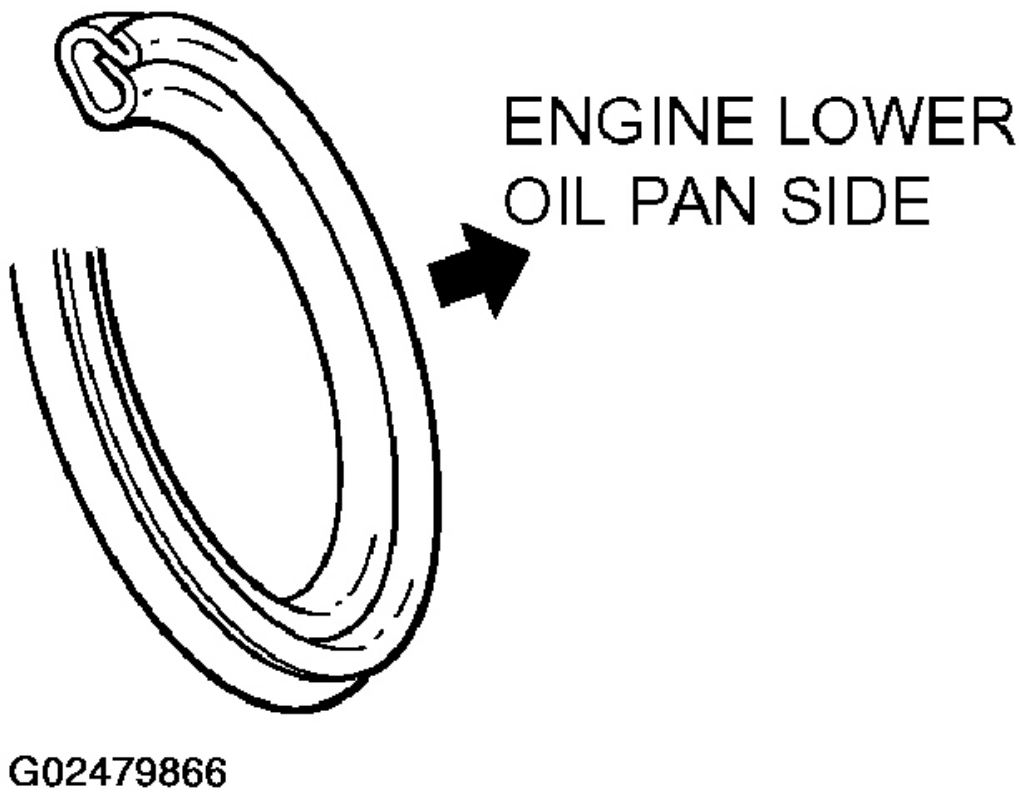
Identifying Engine Oil Pan Drain Plug Gasket
